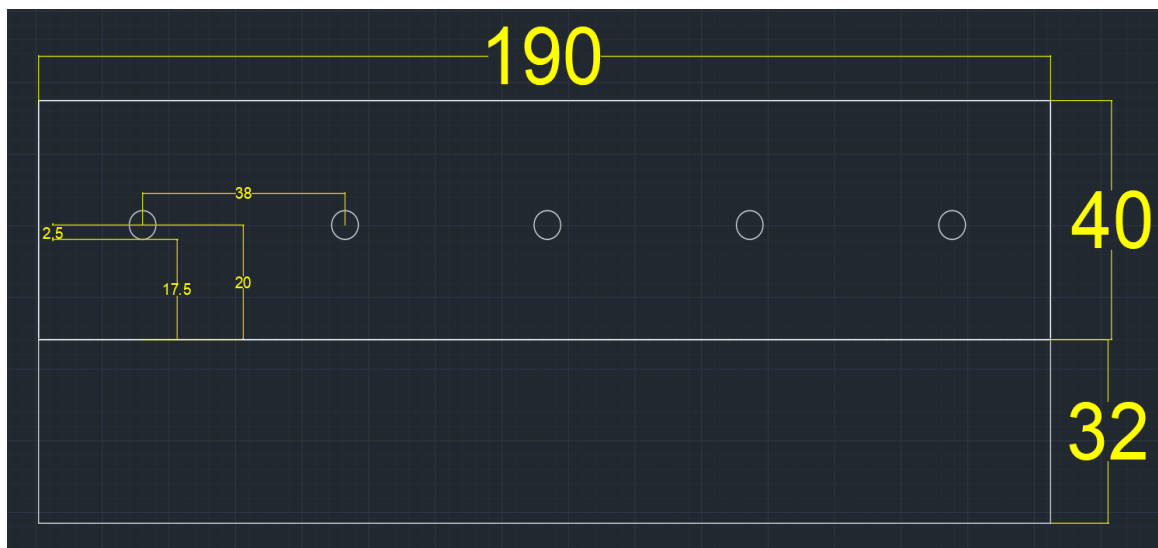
2D Front view of a portion of Photodetector holder with dimensions. Image provided by the Lazer Pong project team.
